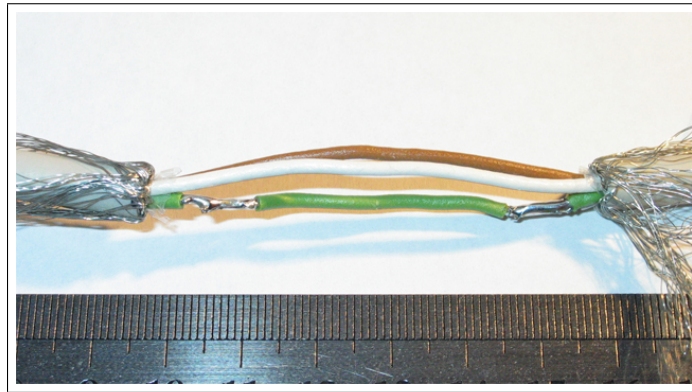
50 mm shielded cable used as a current shunt soldered first
